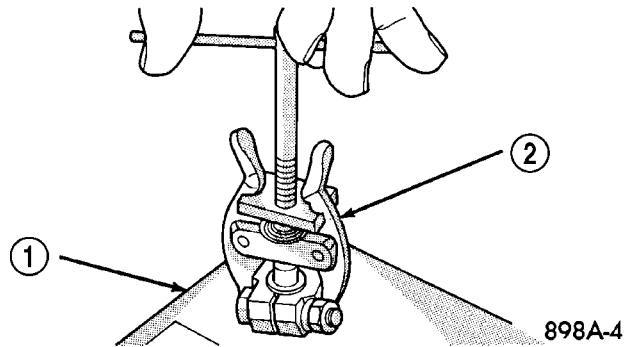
Remove Battery Cable Terminal Clamp - Typical
